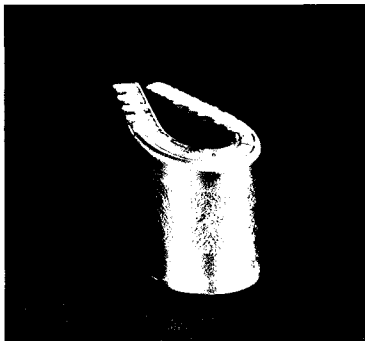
Longitudinal bend-test specimen in which weld runs central and parallel to the long edge.
